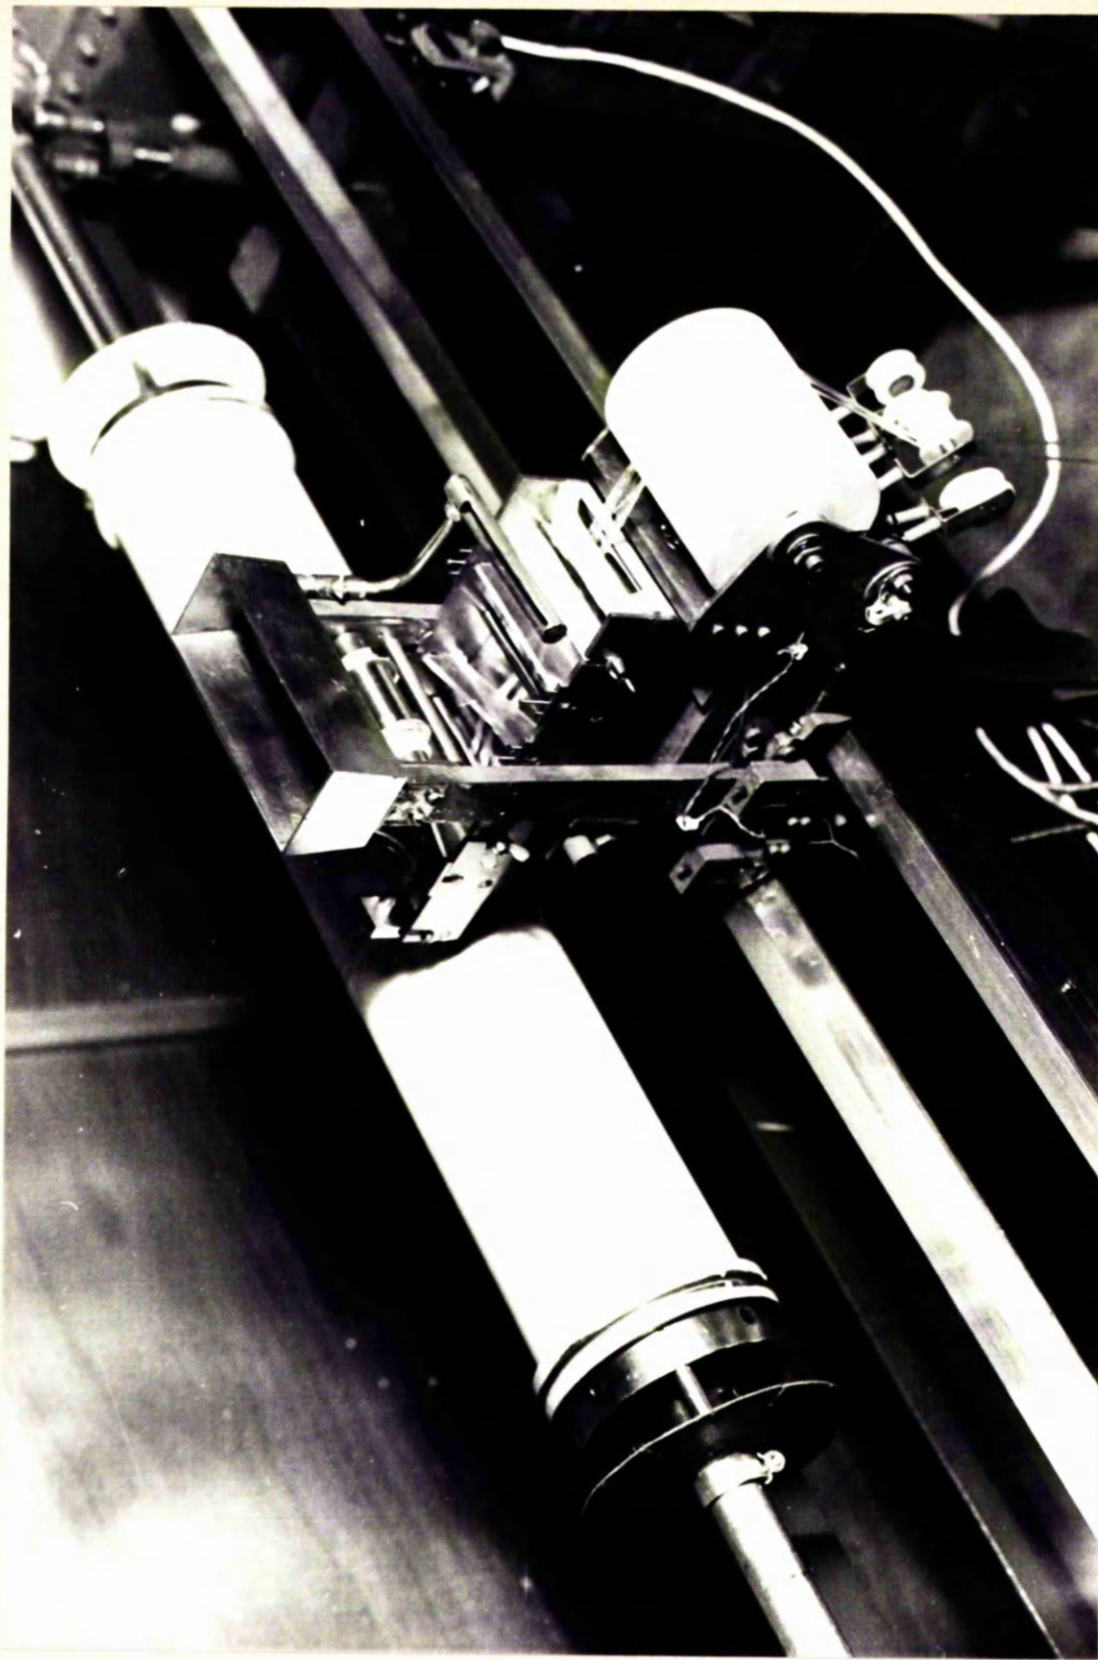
Close-up of Carriage Assembly showing Roving Path.
